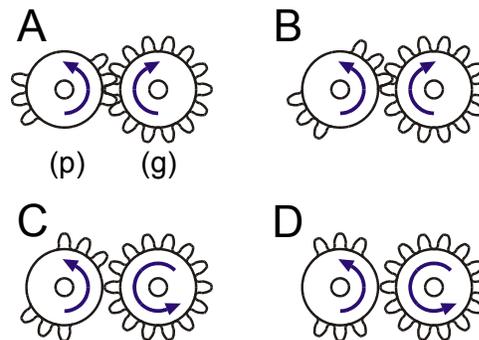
The slip-gear consists of a pinion (p) with several teeth removed, and an unmodified gear (g). While the teeth are engaged (A-B), the jumping mechanism retracts, “winding up” the spring. When the teeth become disengaged, energy stored in a spring causes the gear to rotate quickly (C-D) in the opposite direction of winding.
